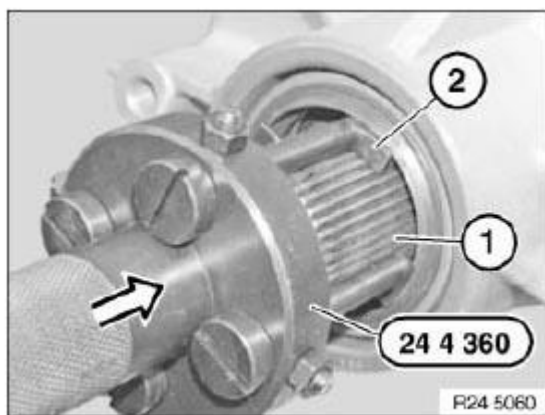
Identifying Special Tools (24 4 360) And Hooks
